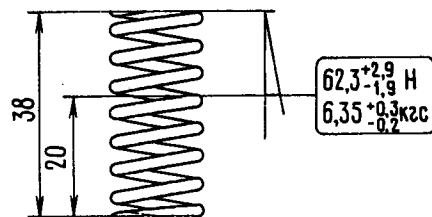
Basic Data for Checking Reducing Valve Spring
